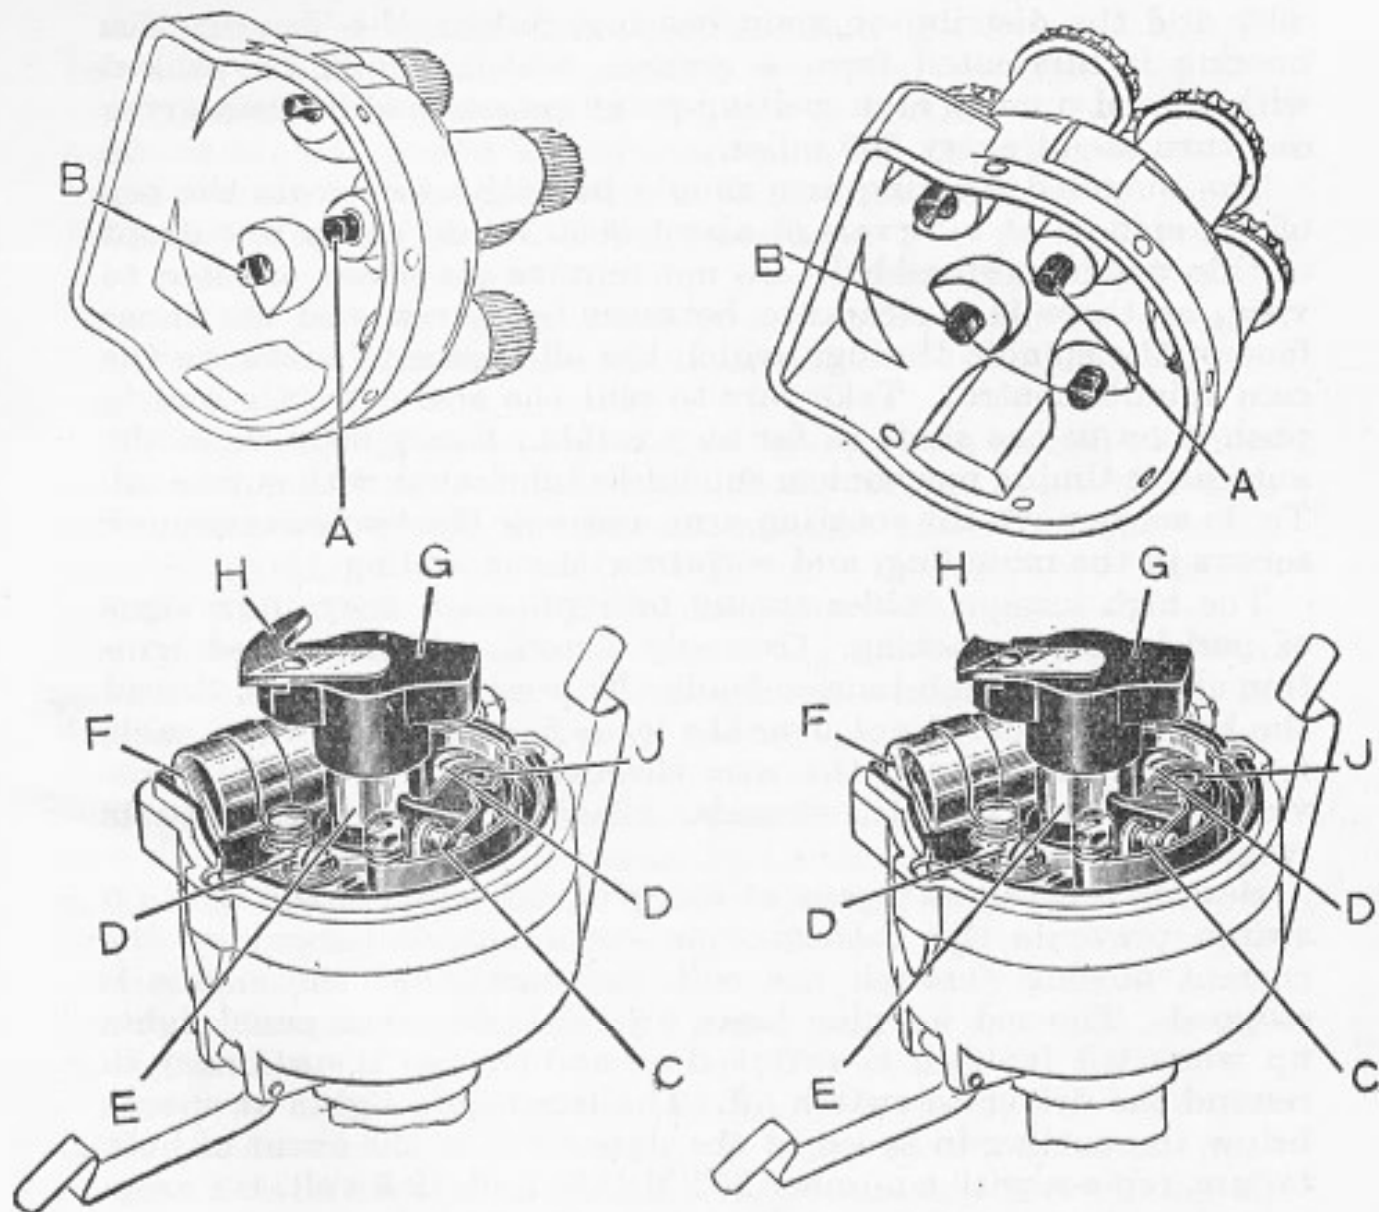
THE DISTRIBUTOR AND CONTACT-BREAKER
